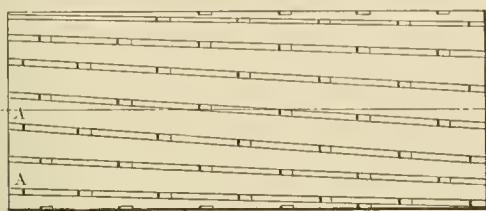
MILLING CUTTER WITH NICKED TEETH.
